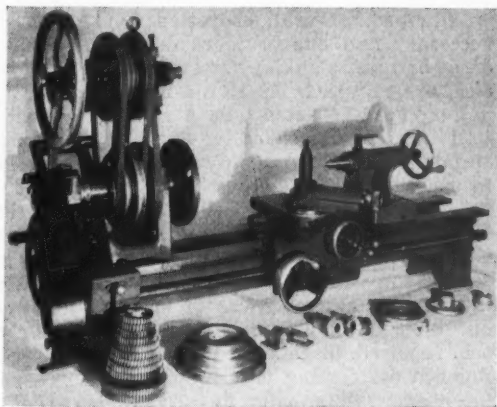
Gears, pulleys and many other parts of the Atlas lathe are die cast from zinc alloys. These parts cost less than finished iron sand castings and are stronger.
